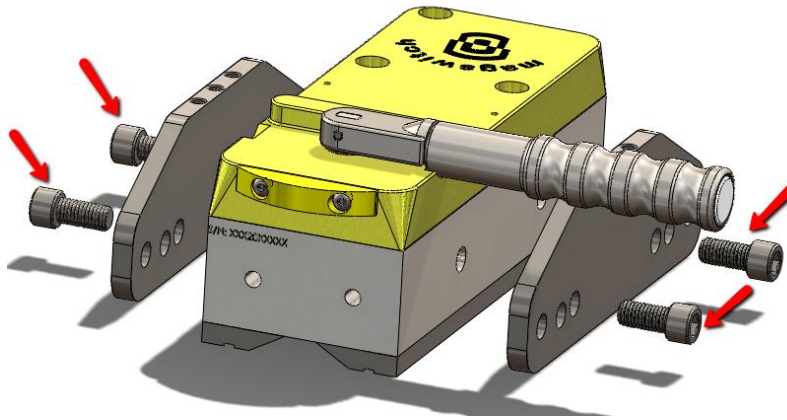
a-1: Connect Two Side Plates with Four M12 Socket Head Bolts
